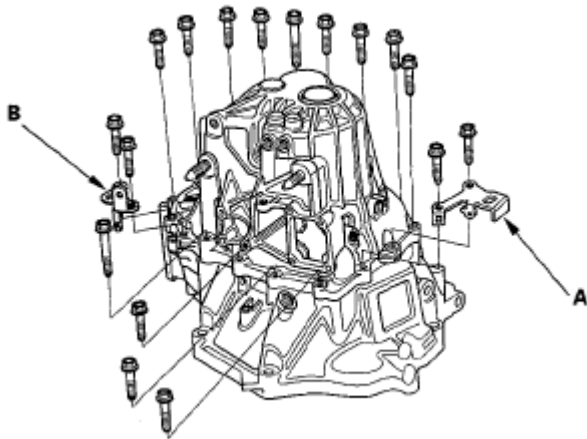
Identifying Transmission Hangers And Flange Bolts
